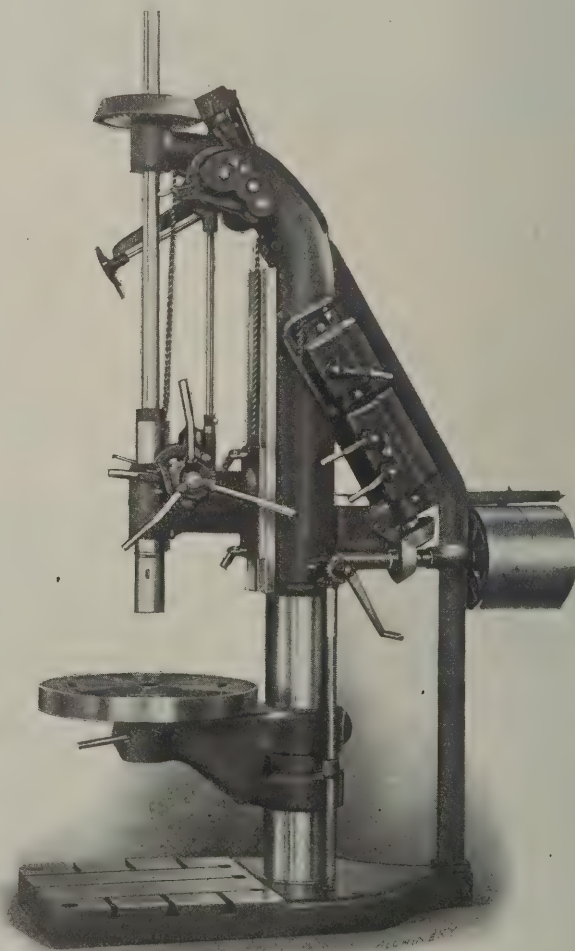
Barnes 26-inch All-gear-driven Drilling Machine, with Sliding Head
